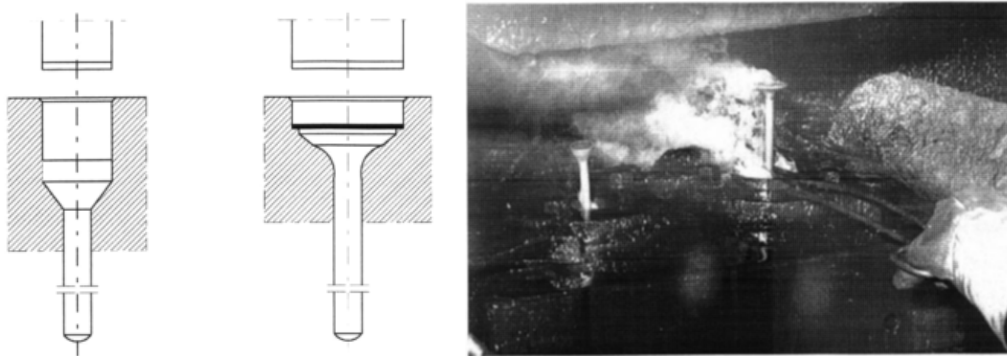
Preliminary and final extrusion on the crank press „Maxi” Eumuco SP65
